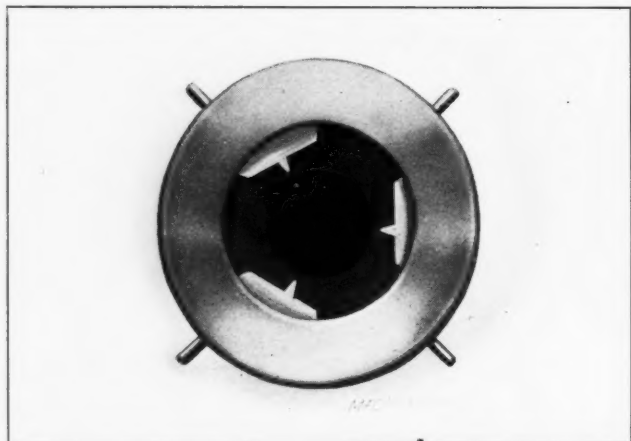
End View of Chuck for Holding Spur Gears when Grinding the Holes
